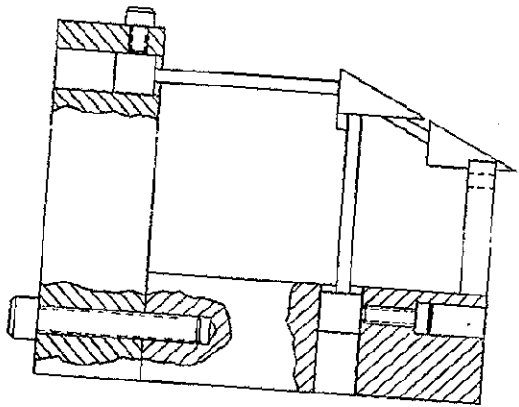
Vibration Fixture and Dual Patch Assembly
